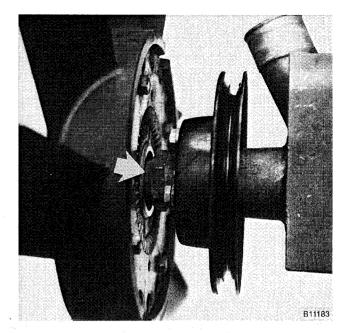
Radiator cooling fan nut (arrow). Nut has left-hand threads.
